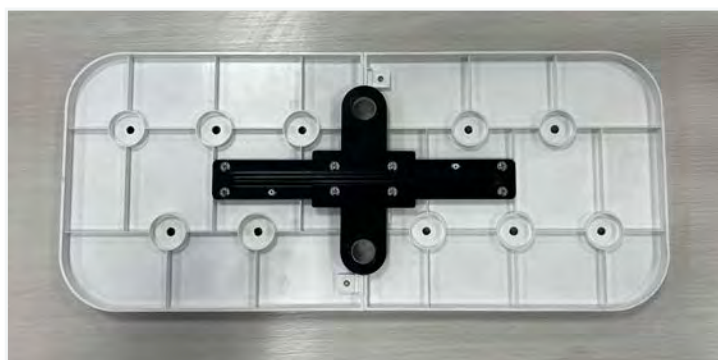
Front view of the thread stand with the screws fully inserted and secured.
